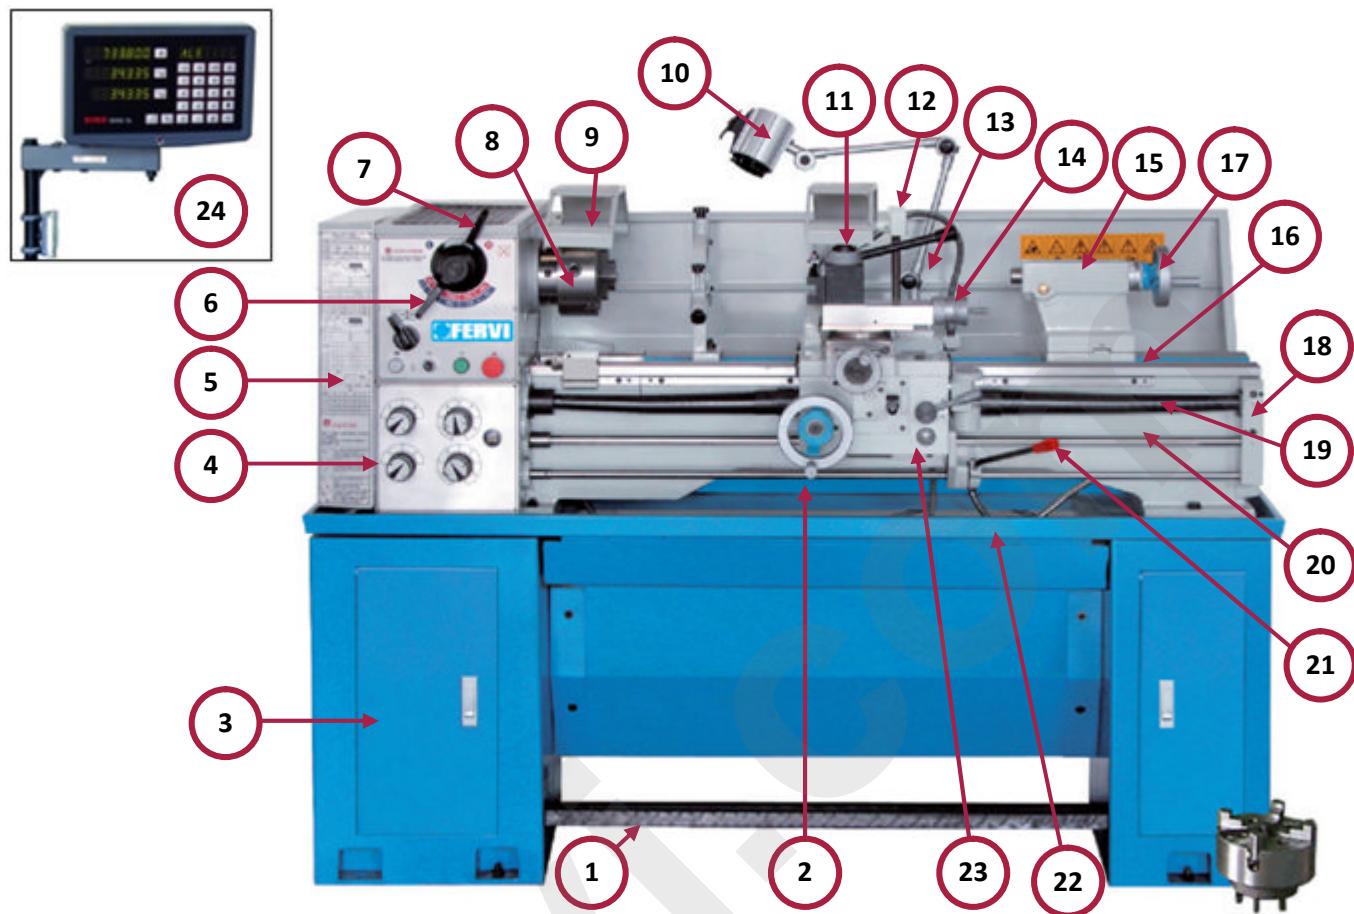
Main parts of the gear head lathe (Art. T999/230V and T999/400V).
